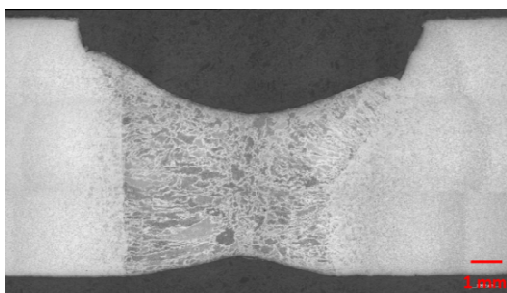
Sample B3 – root weld, short arc 130 A
